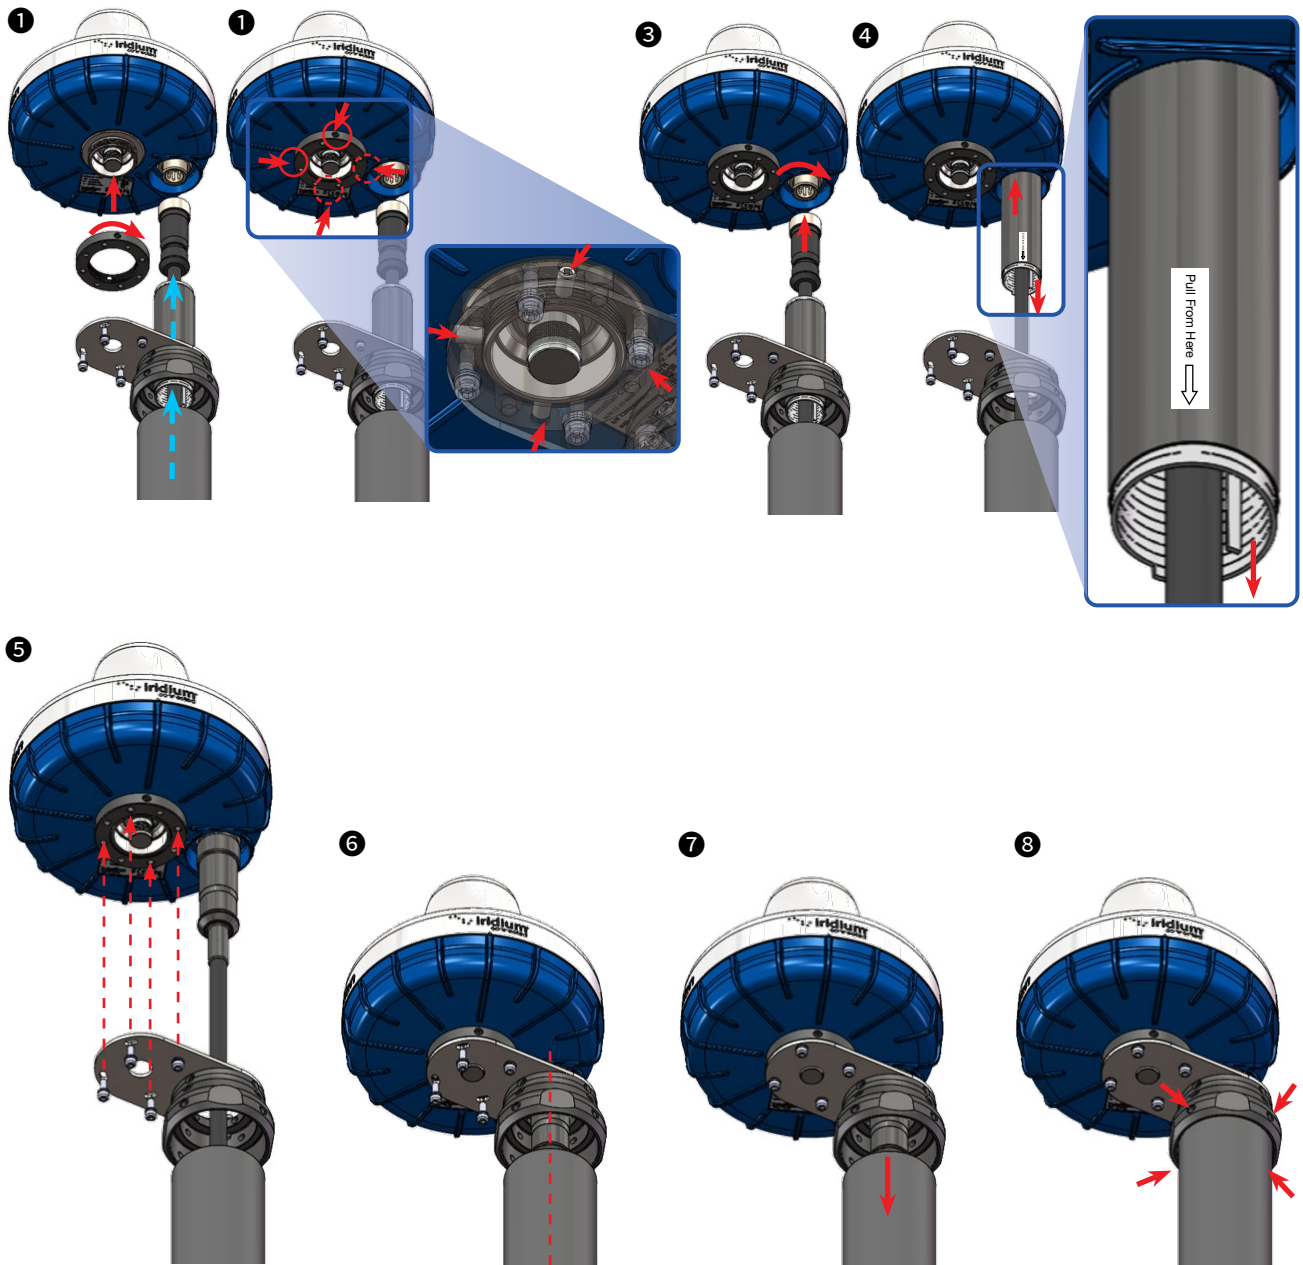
Offset Mounting with Internal NMEA 2000 Cable Installation
